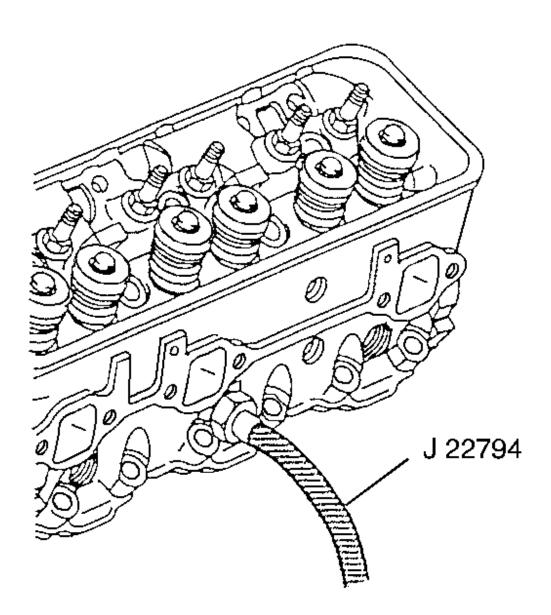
Compressing Valve Spring (Cylinder Head Installed) Using Special Tools Courtesy of GENERAL MOTORS CORP.
